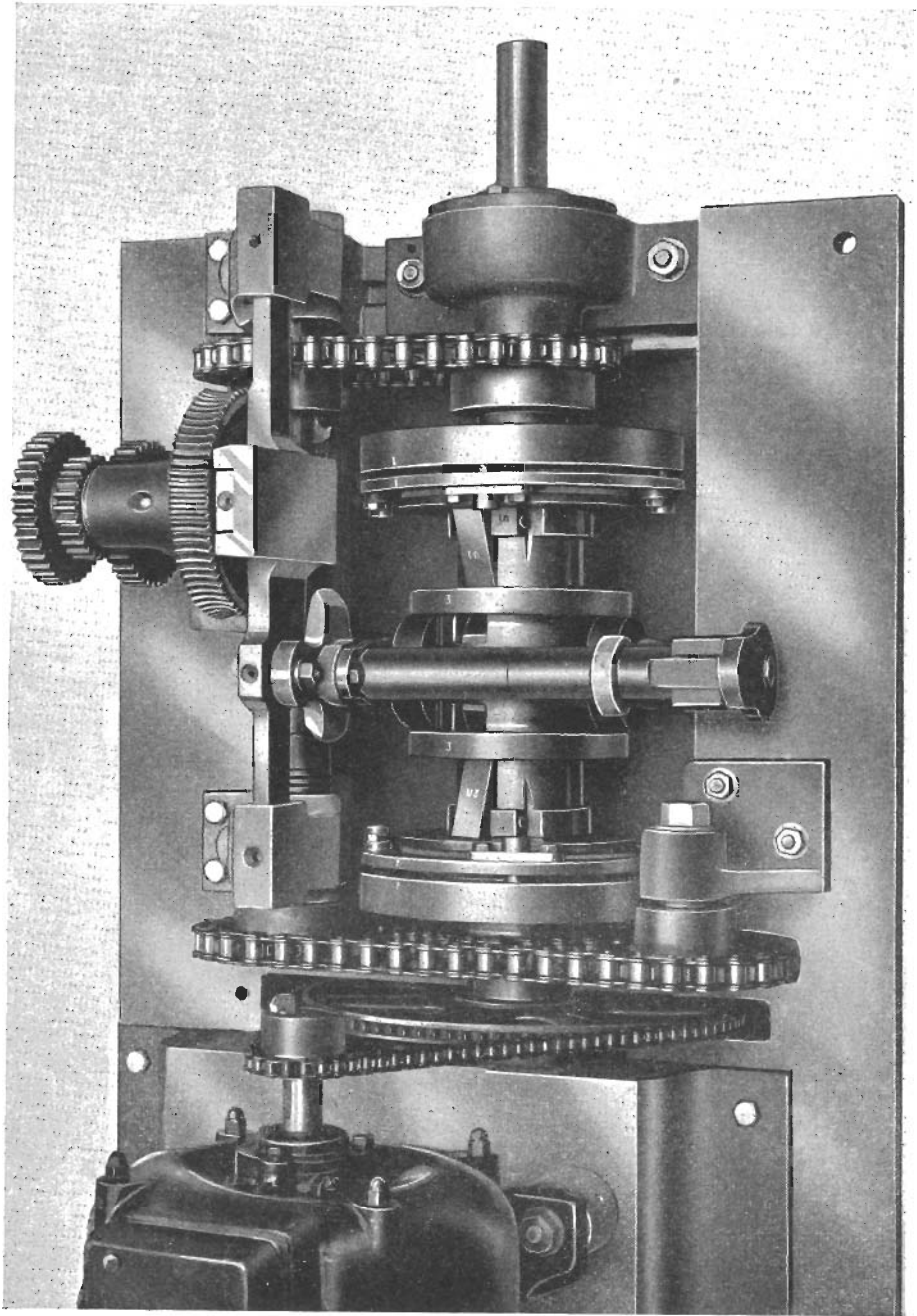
Assembly arrangement of Lightburn reversing clutch.
